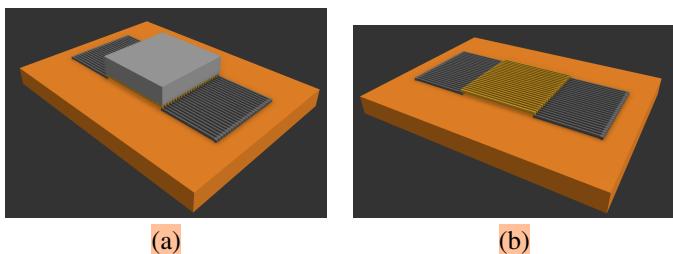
3-D visualizations of the yield-test assembly: (a) dummy die flip-chipped onto the interposer; (b) interposer with the dummy die removed, highlighting the connector and the exposed traces used for continuity tests.
